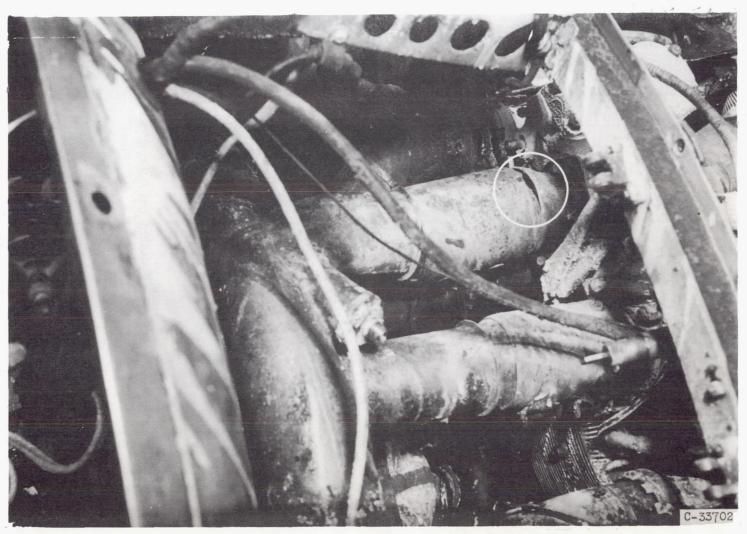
Broken generator mounting flanges in right-engine nacelle.
